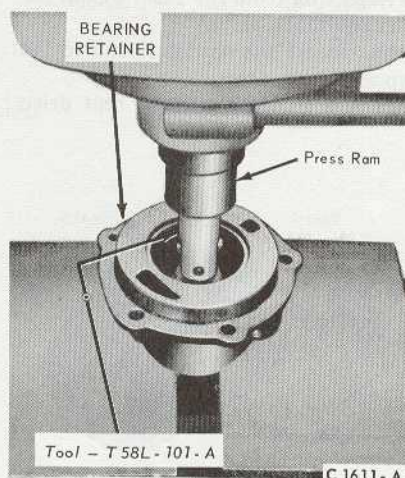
Removing Rear Bearing Retainer Outer Cup, Bearing and Seal
